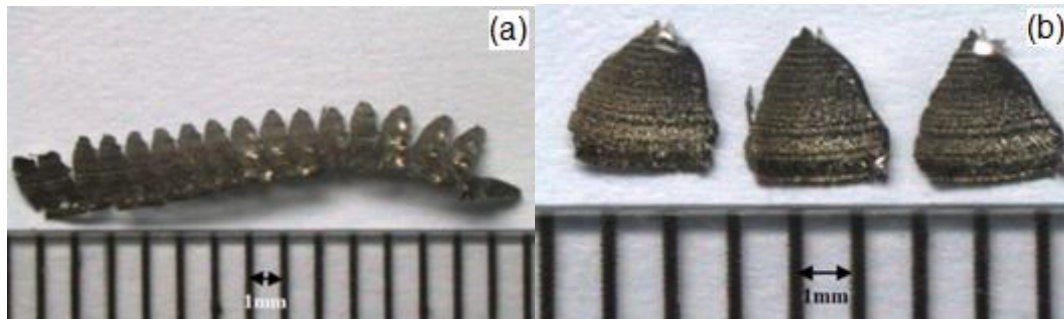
Chips formed in up-milling (a) and down-milling (b) operations [38].
